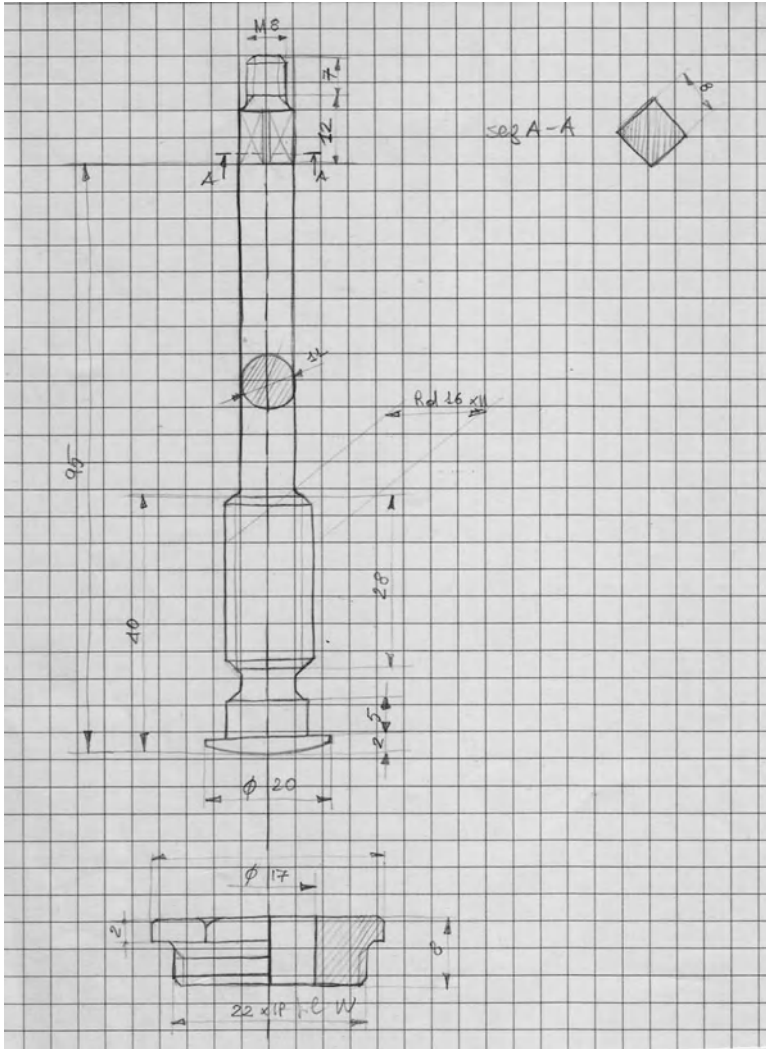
Constructive drawings of some parts of the machine of Fig. 7.36
